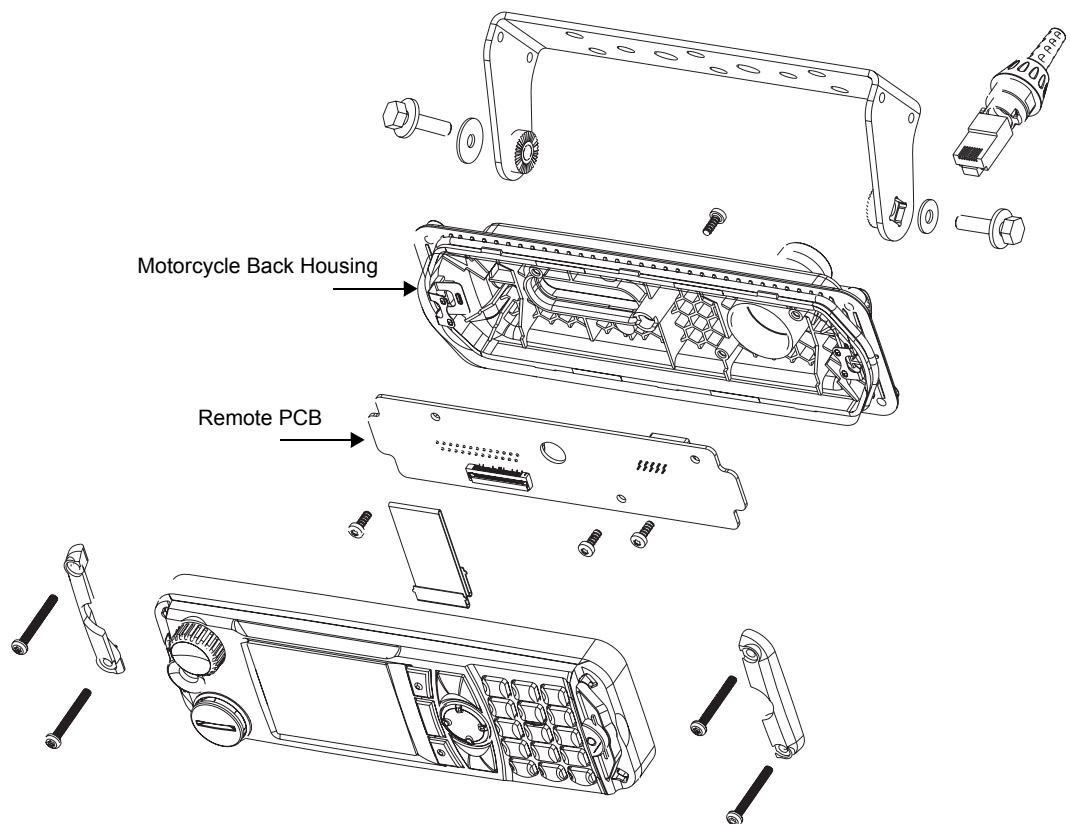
Motorcycle Enhanced Control Head Exploded View
